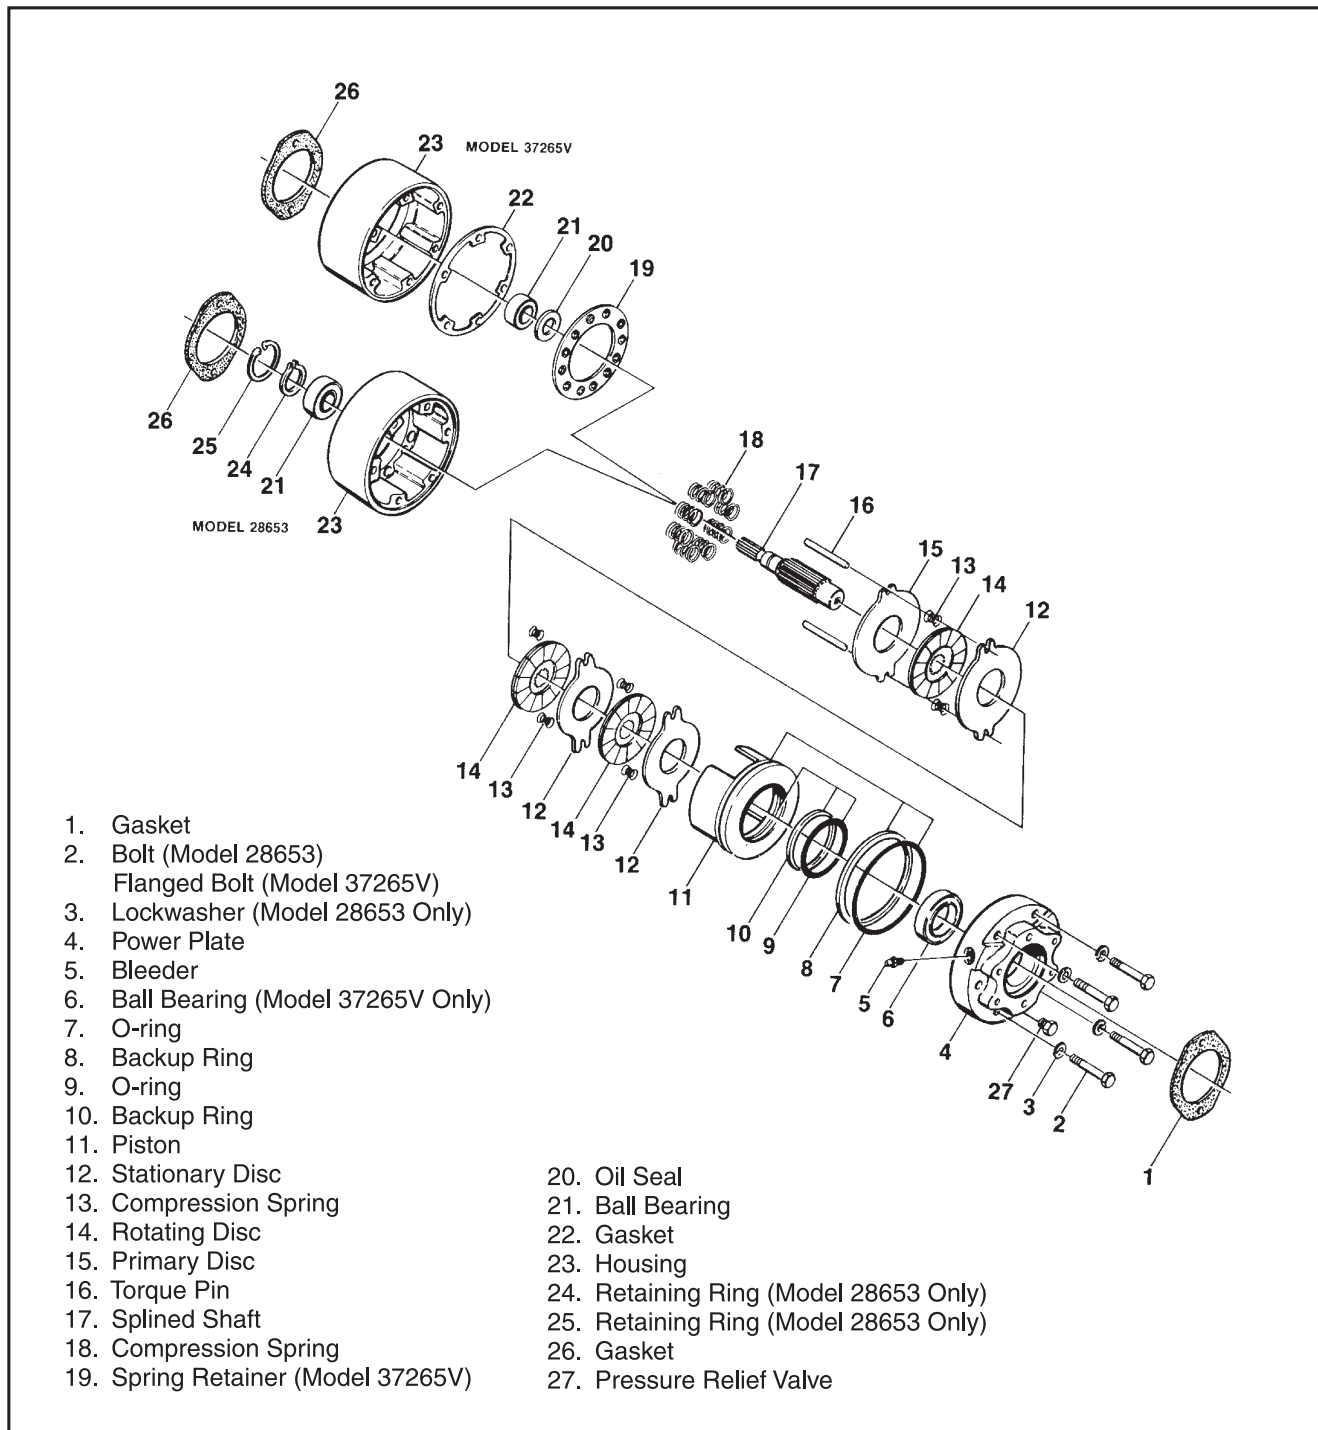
Swing Brake - Ausco - Machines Built to 1992
